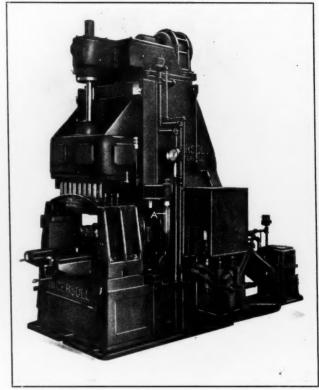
Multiple-spindle Drilling Machine equipped with One Vertical and One Horizontal Head
